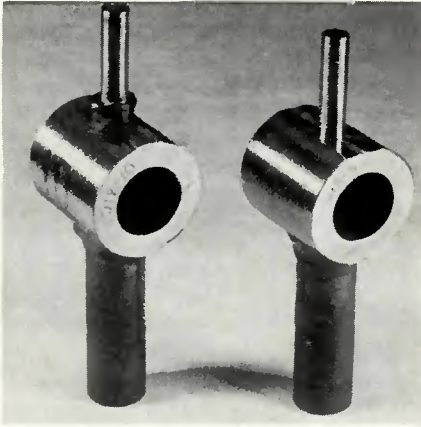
Friction welded pins to tubes: left, as-welded; right, upset removed
